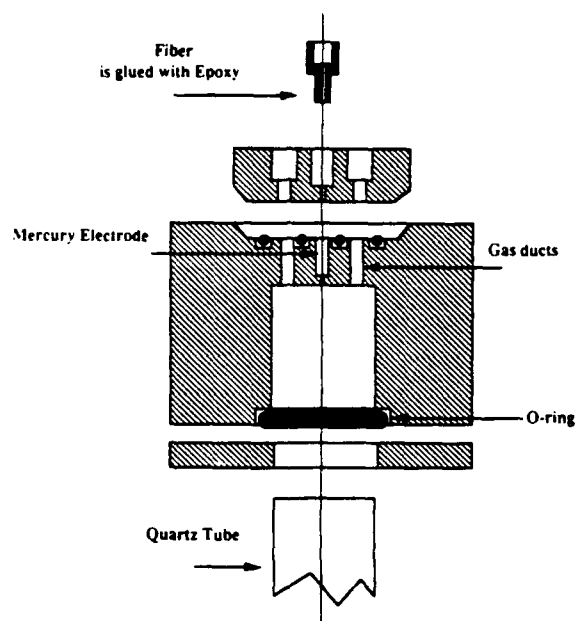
Cutaway view of the end-cap and fibre upper end fixture.
